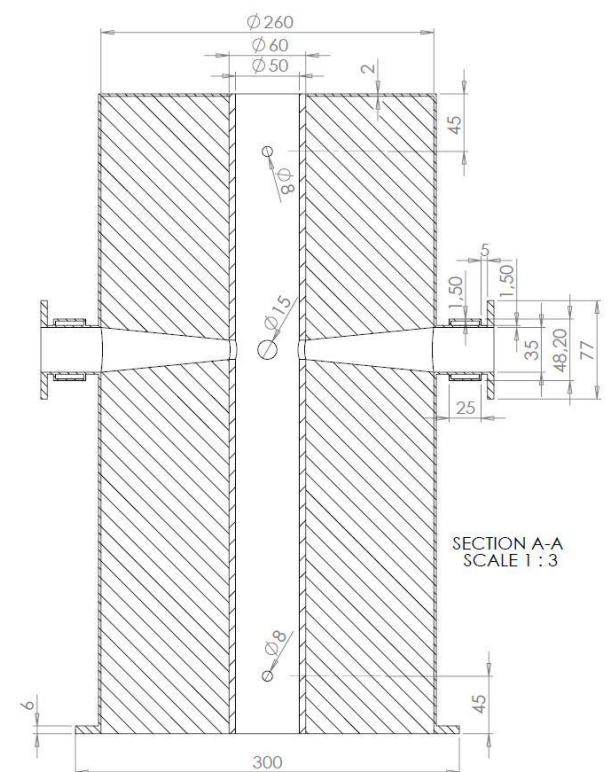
Detailed 2D drawing of the reactor with dimensions given in mm
